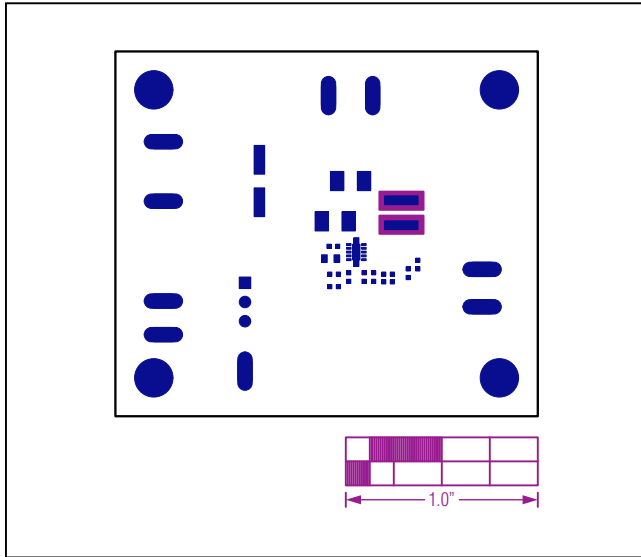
MAX17542G 5V Output EV Kit Component Placement Guide—Top Solder Mask
